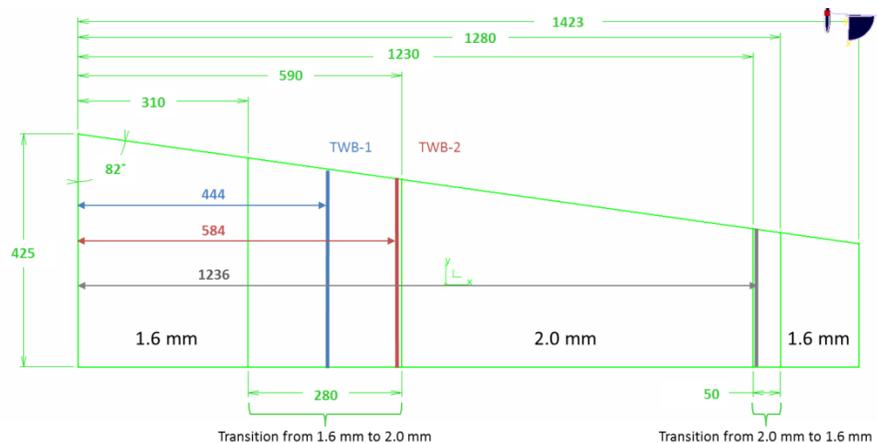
Blank dimensions for tailor rolled/welded blanks.
